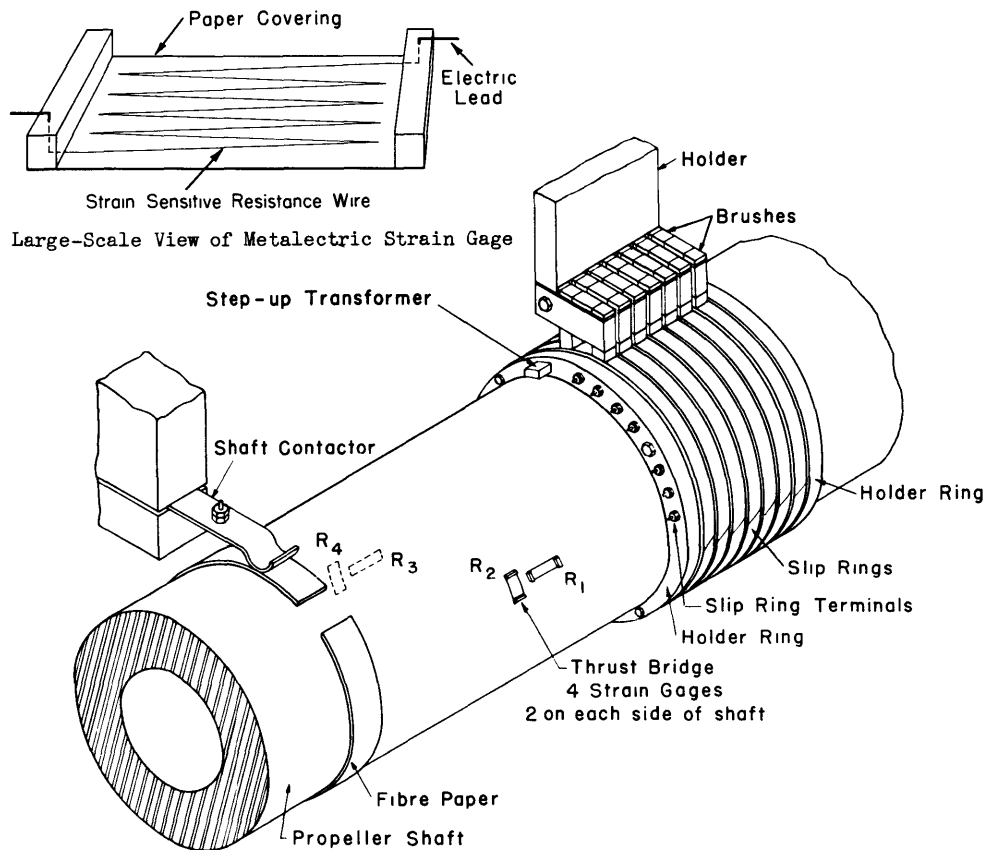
Diagram of Thrust Gages and Accessories, Mounted on a Propeller Shaft
